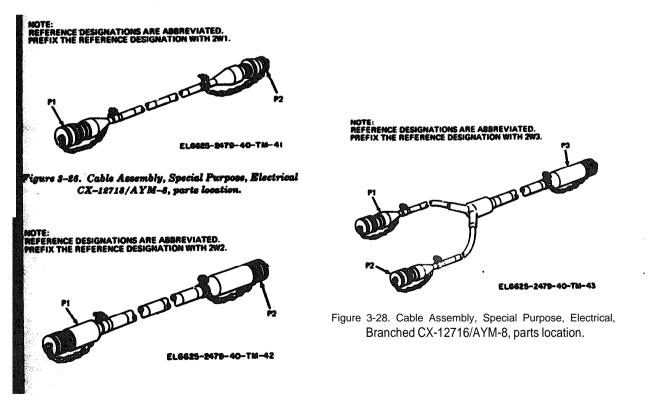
Cable Assembly, Special Purpose, Electrical CX-12715/AYM-8, parts location.
